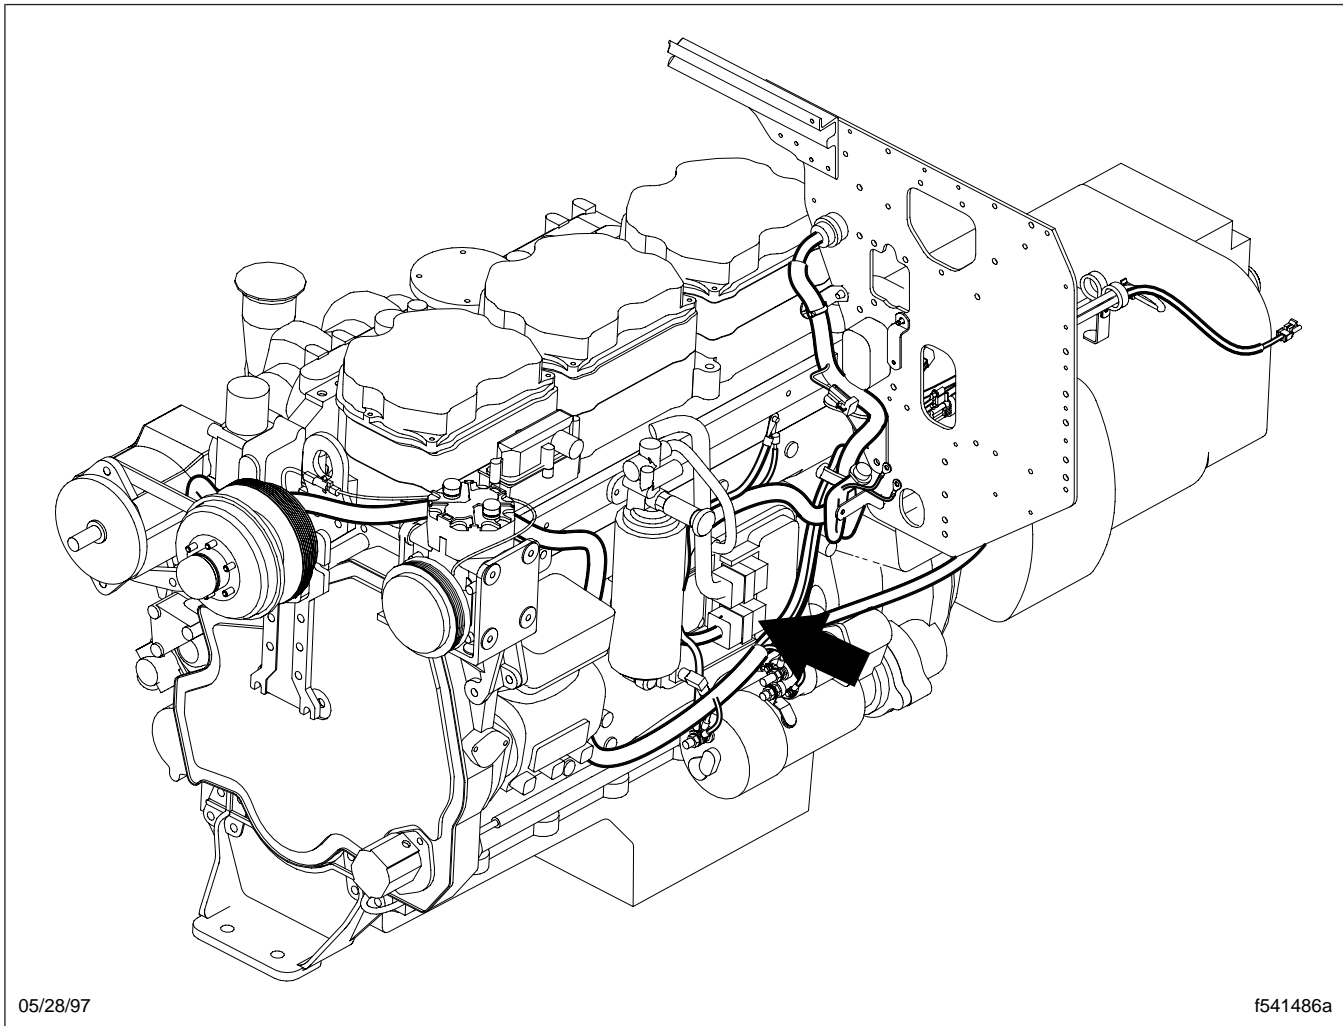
, Caterpillar C-10/C-12/3176 Engine ECU Location
